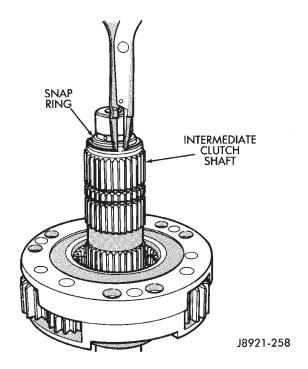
Removing Intermediate Clutch Shaft Snap Ring
